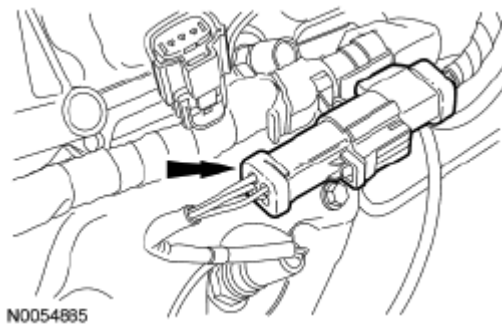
Locating LH Heated Oxygen Sensor (HO2S) Electrical Connector
